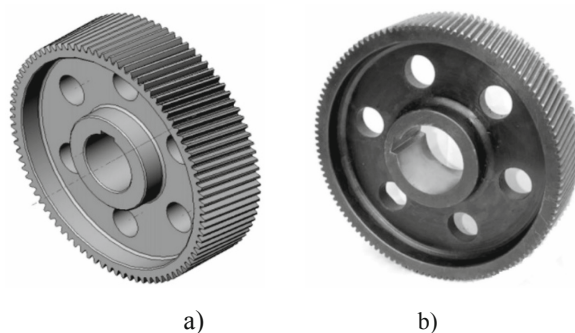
3D model of a gear wheel, where: a) in the SolidWorks software window; b) real view of the gear wheel.
